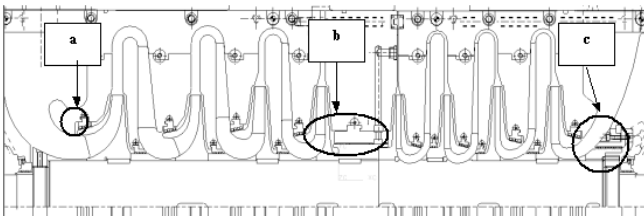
Back-to-Back Compressor Casing Cross Sectional Drawing: Detail of Rotor and Seals (a: Impeller Shroud Seal, b: Honeycomb Interstage Seal, c: Abradable (Final Balance) Seal).
